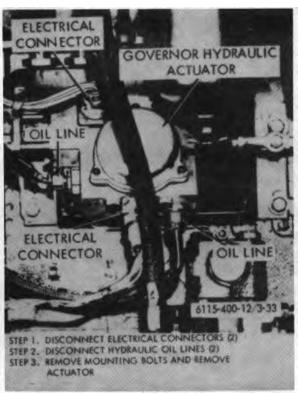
Electric governor hydraulic actuator, removal and installation.
